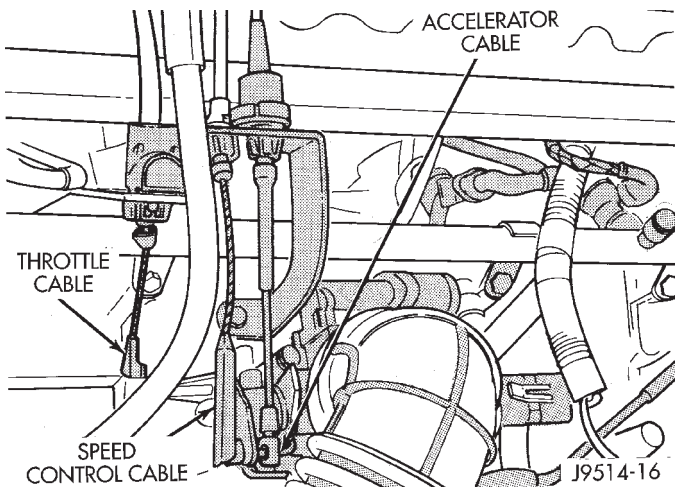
Accelerator Cable, Throttle Cable and Speed Control Cable
